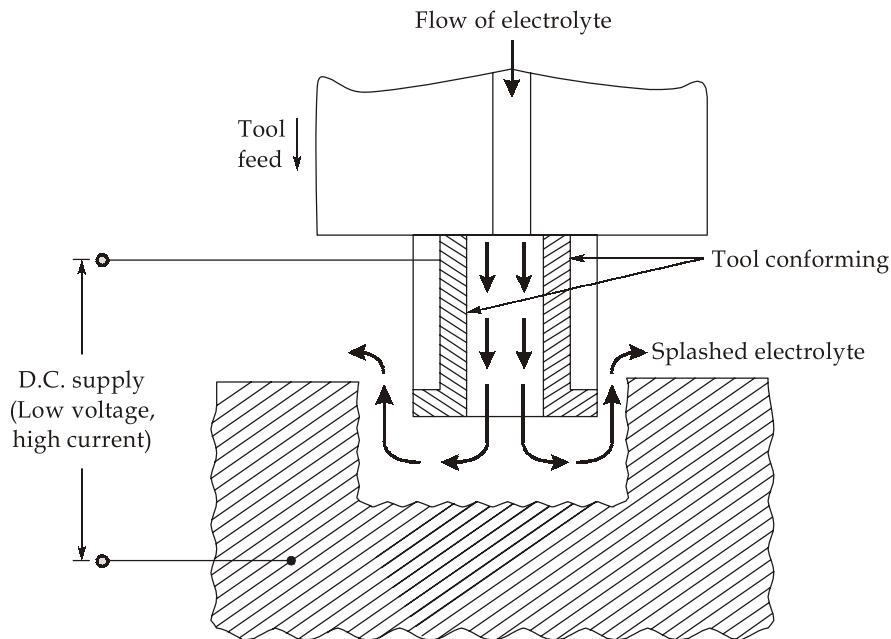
Set up for Electro-Chemical Machining (ECM)
